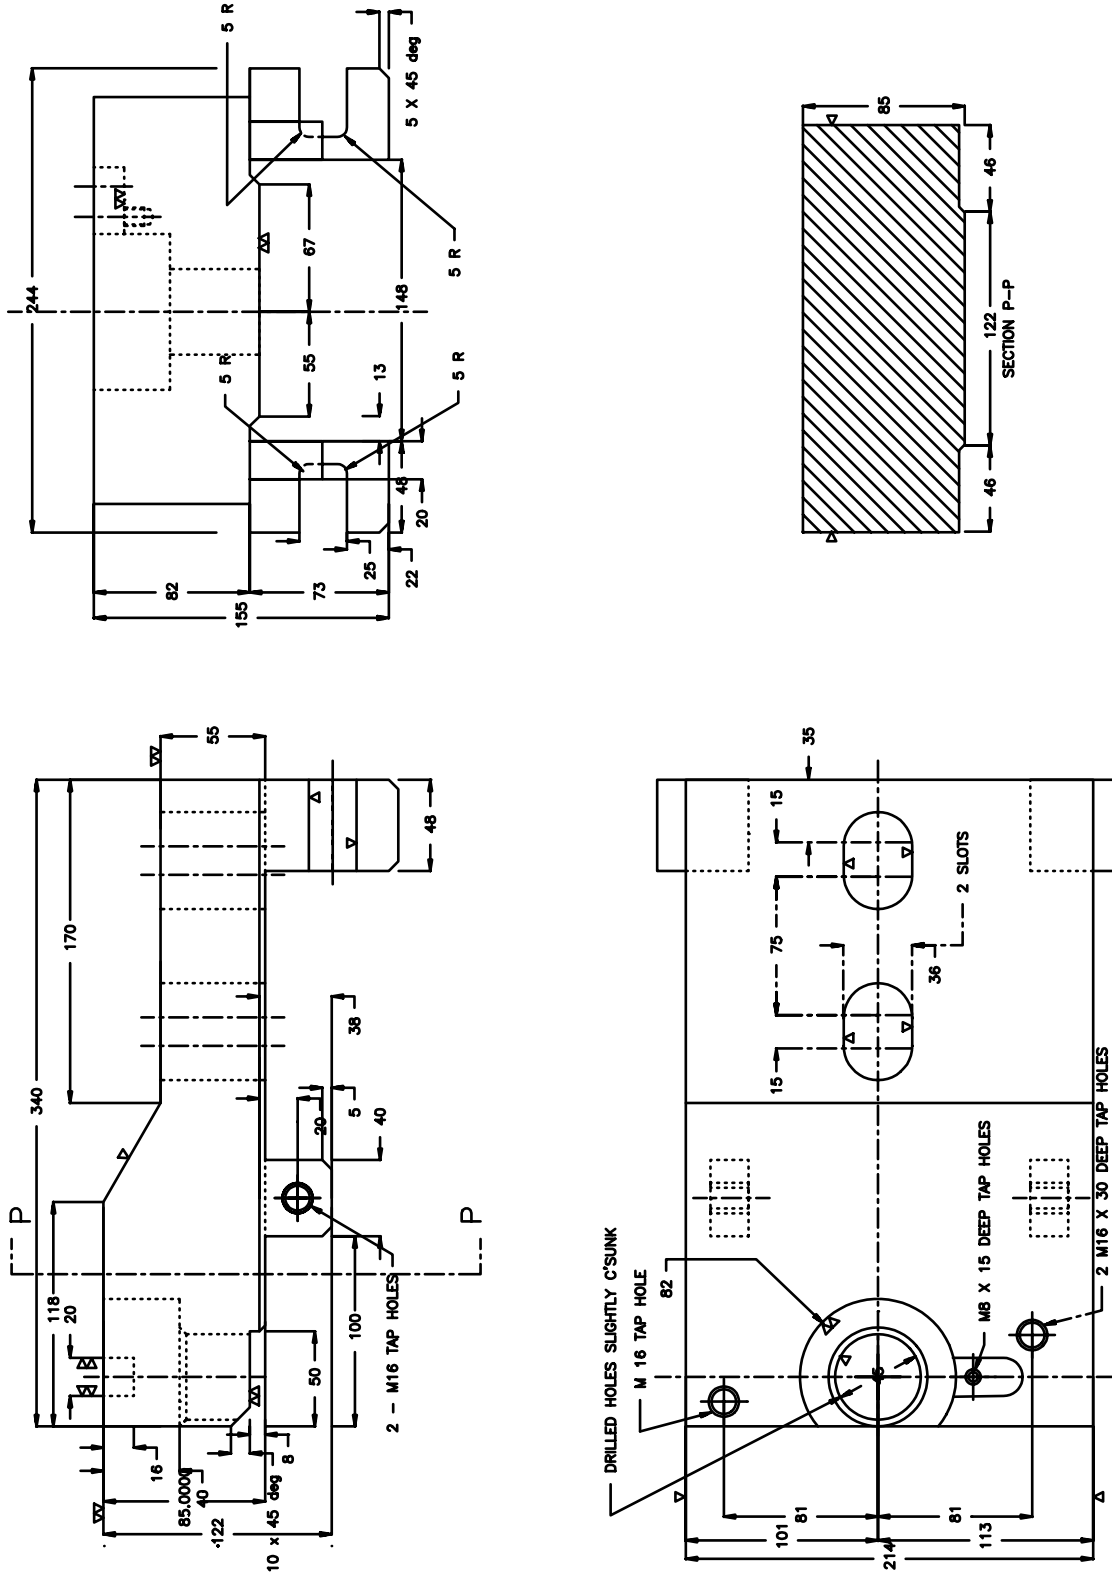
Information present in a 2D drawing (drawing produced using AutoCAD)
